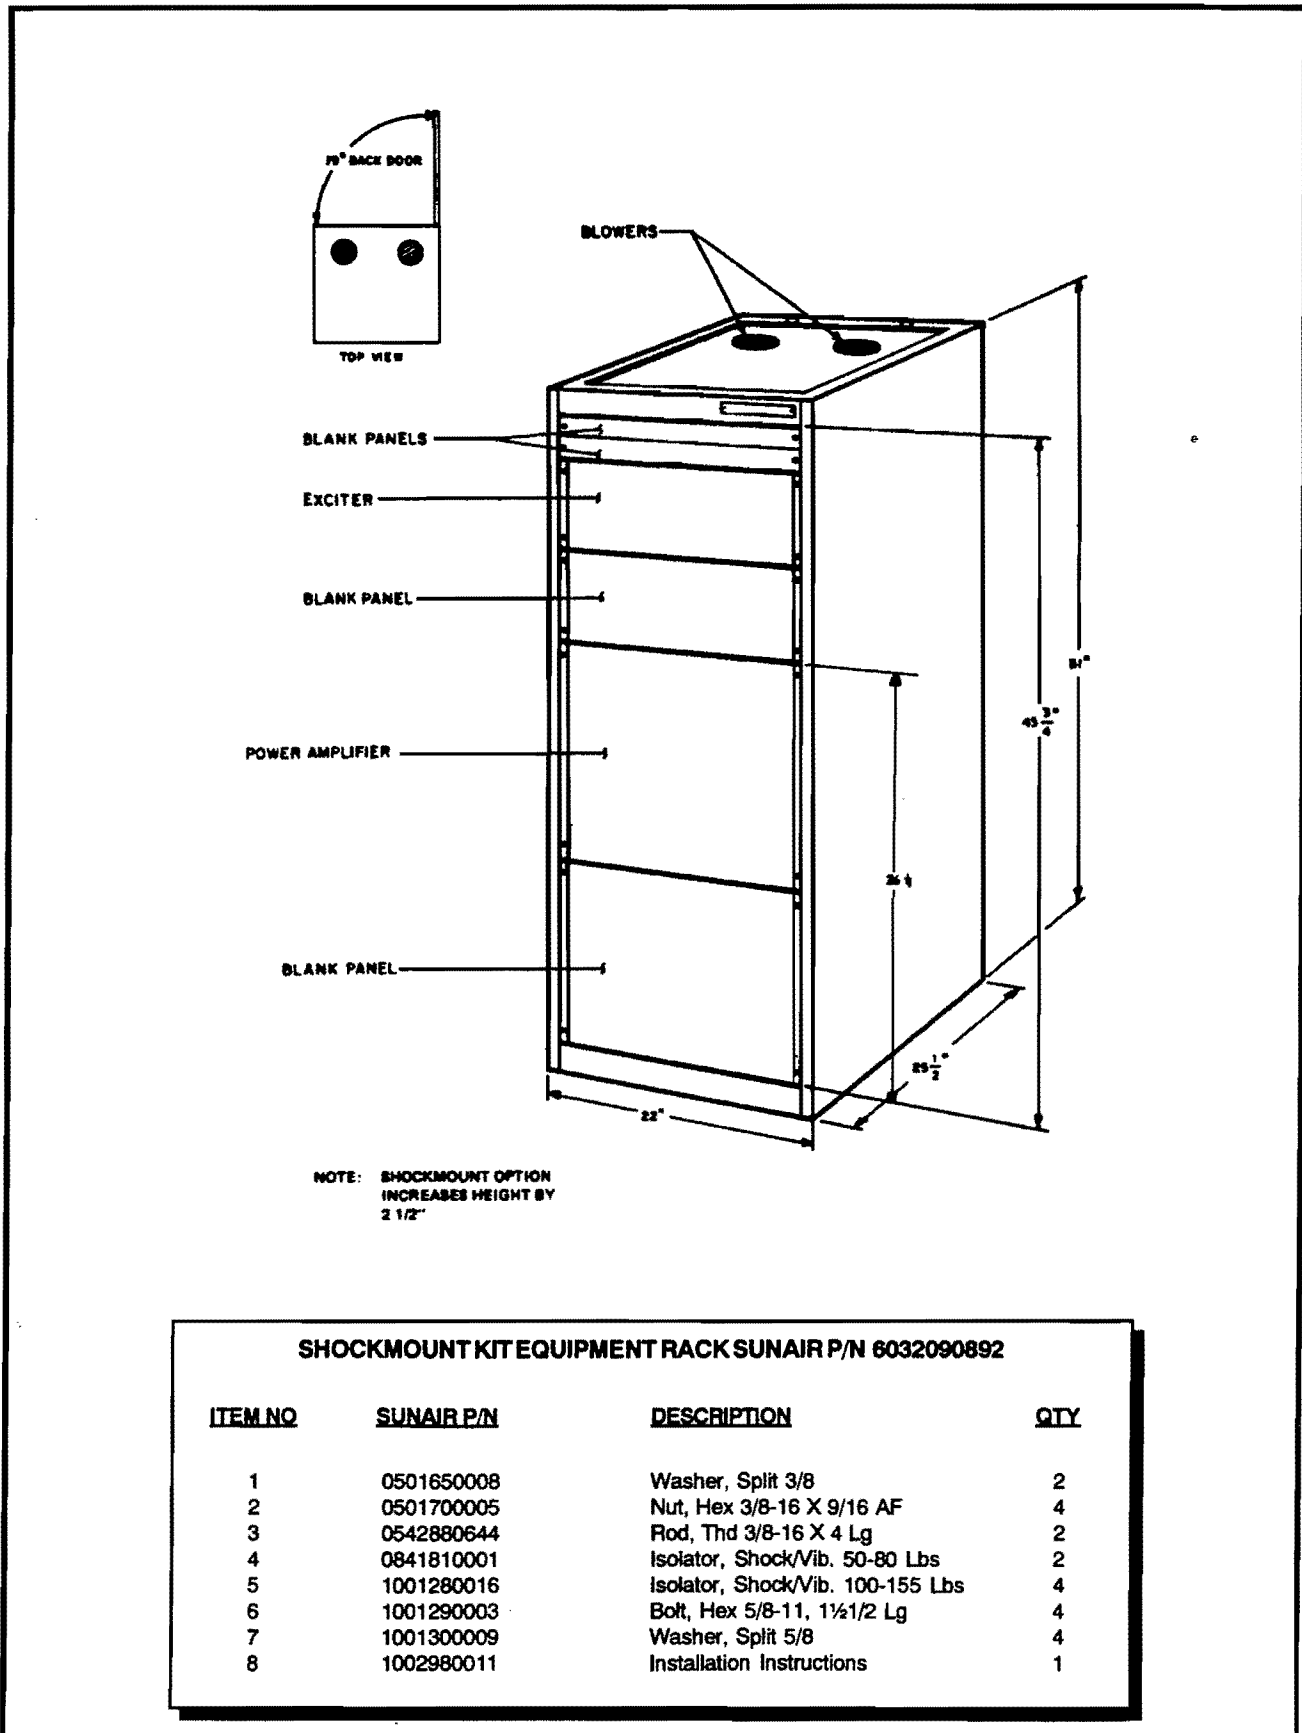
Shockmount Equipment Rack With Outline Dimensions And Details (Sheet 2/2).
